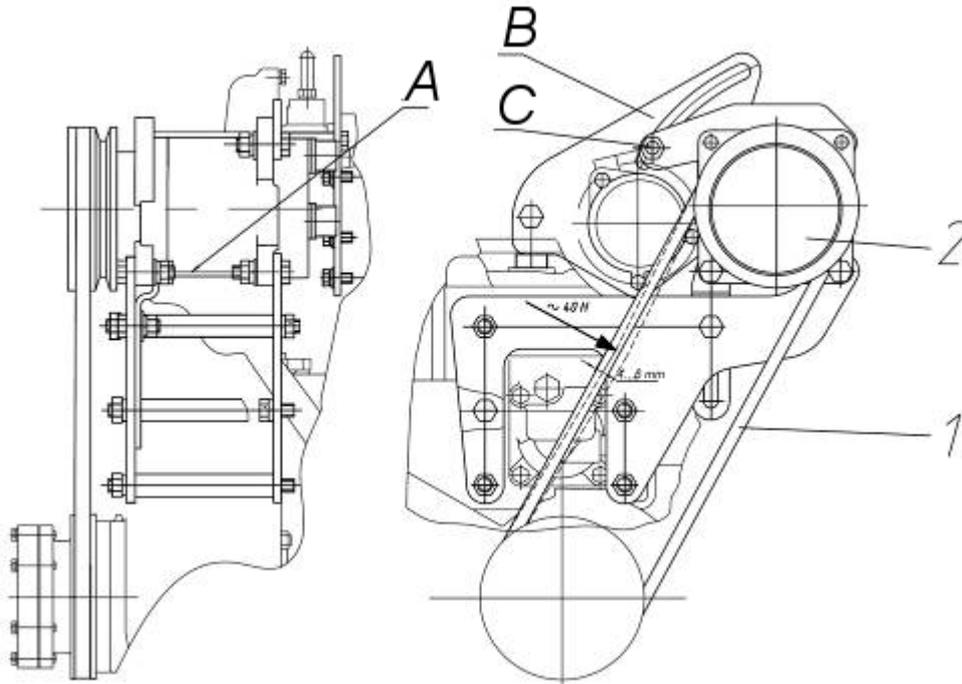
Check / adjust tension of the air conditioner compressor drive belt.
